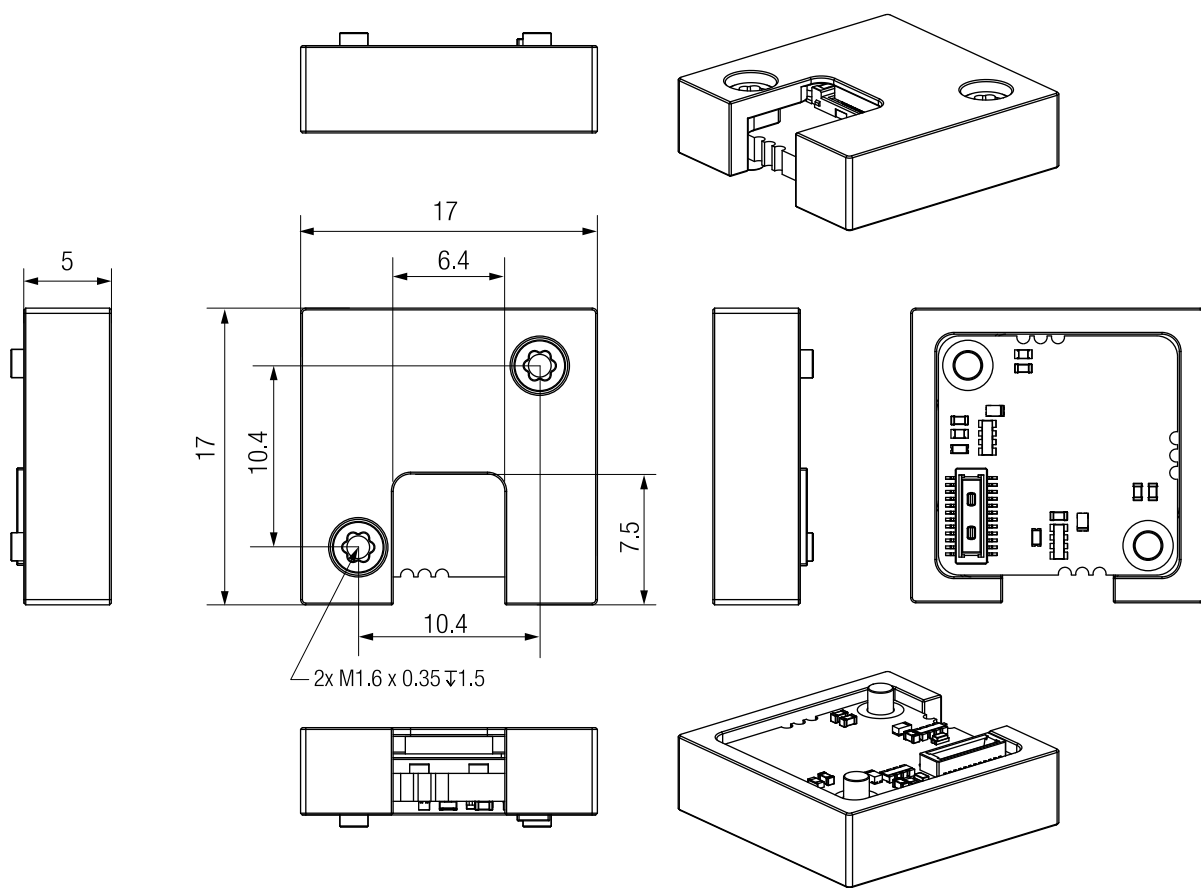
Dimensional drawing of ADPT-MU-17X17-CX3-UC
